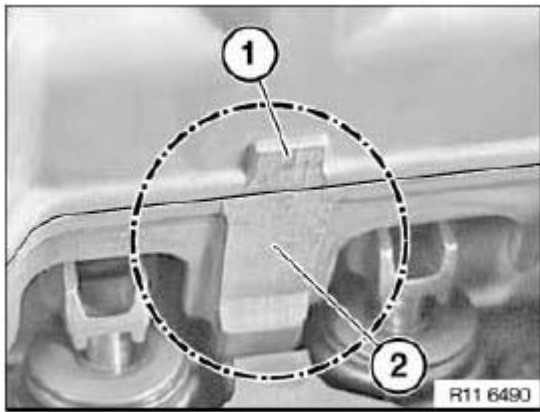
Aligning Mark Of Lower Bearing Bank And Upper Bearing Banks
